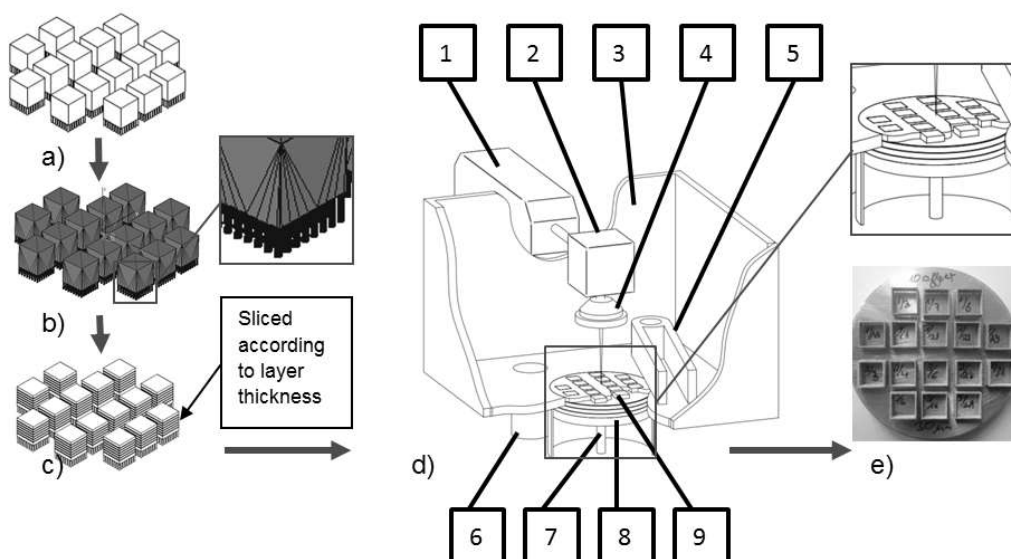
Process of Selective Laser Melting - a) 3D-CAD file, b) STL file, c) Sliced file, d) Scheme of SLM machine, consisting of: 1) Laser source 2) XY-Scanner 3) Processing chamber 4) F-Theta lens 5) Double-bladed recoating unit and
